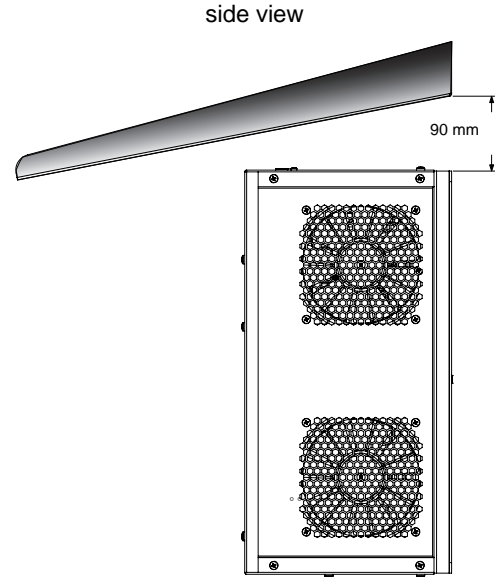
Drip Shield Placement (Inverter Front Panel Facing Up)
